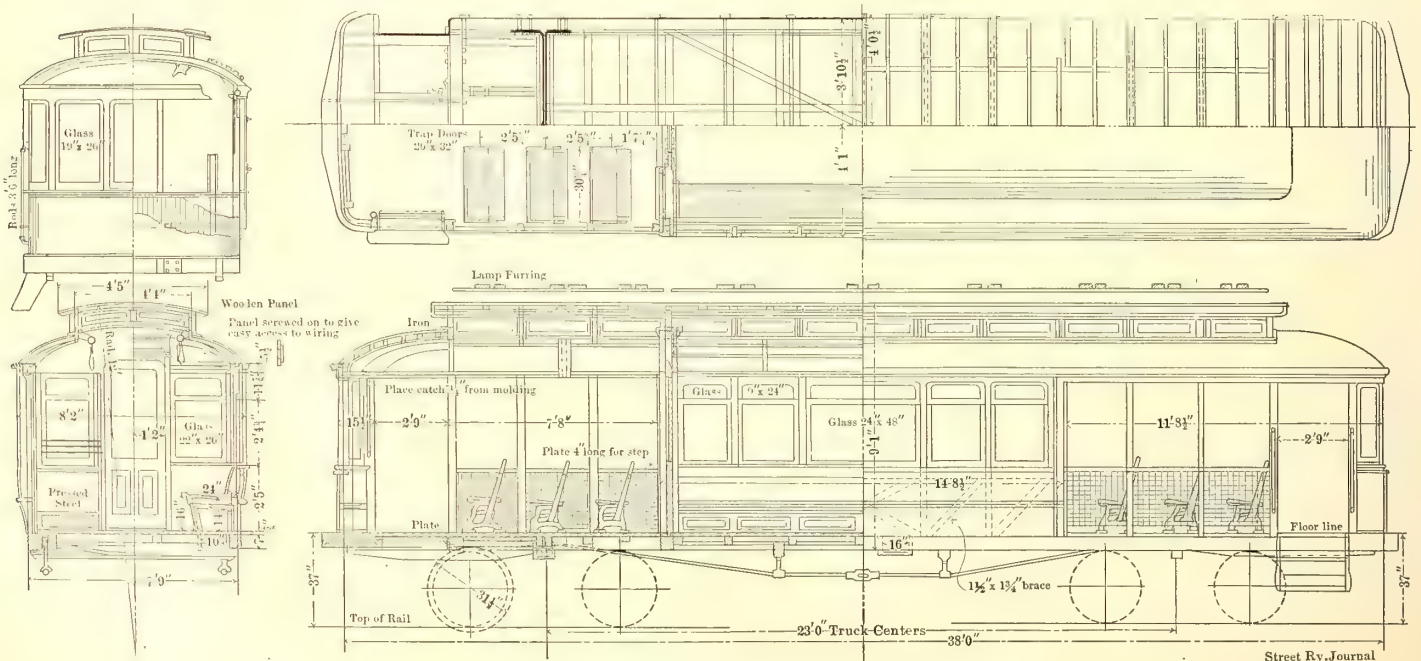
PLAN AND CROSS-SECTION OF CAR
